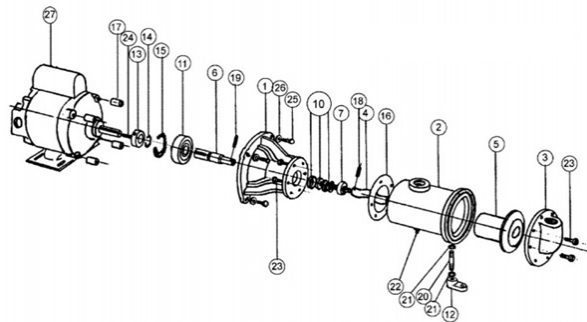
Pumps & Parts Online (2016) 101M exploded view and parts list (product diagram). Available at: <https://www.pumpsandpartsonline.com/101m-exploded-view-and-parts-list/>
